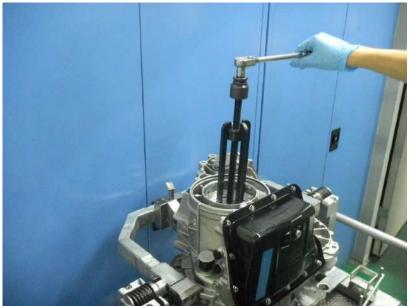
Tighten centre bolt of bearing puller to lift out bearing
